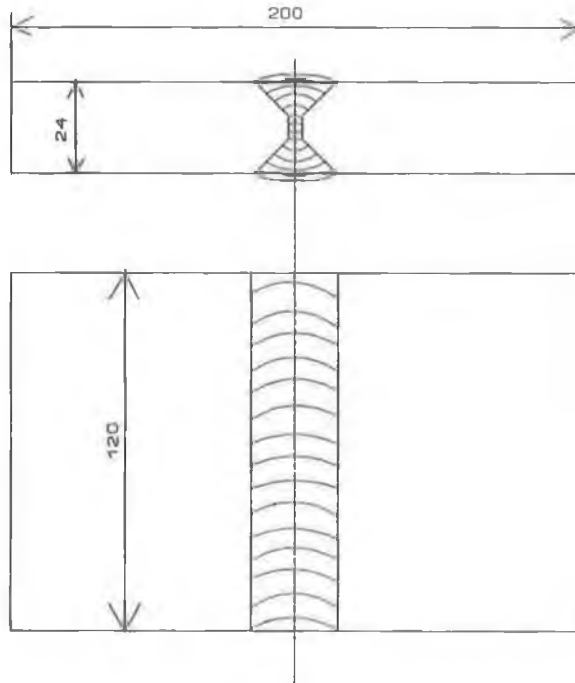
DRAWING OF THE STAINLESS-STEEL WELDED COMPONENT.
